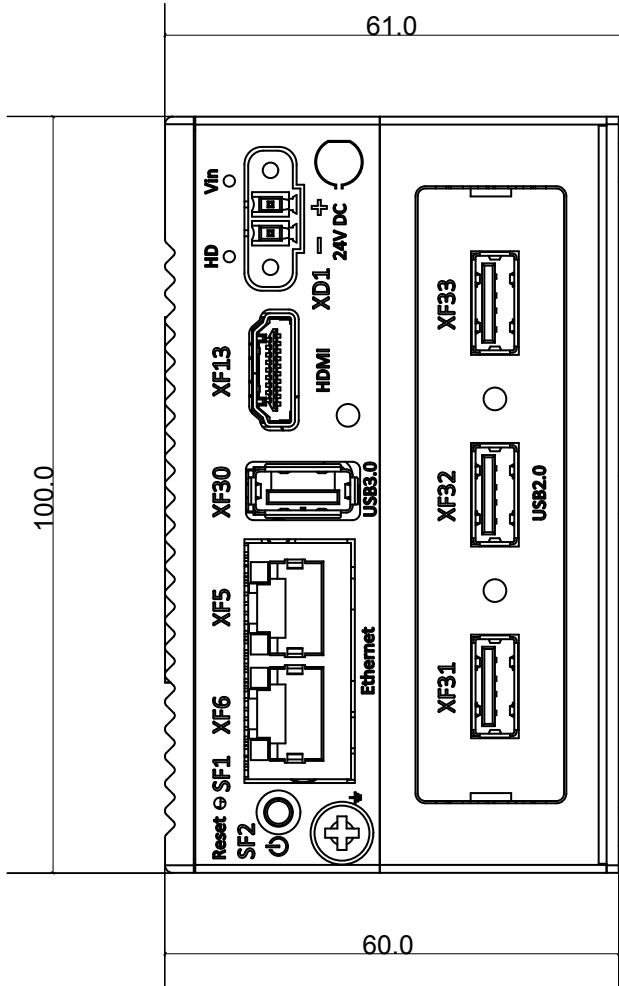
Mounting dimensions for device variant NB, top-hat rail mounting
